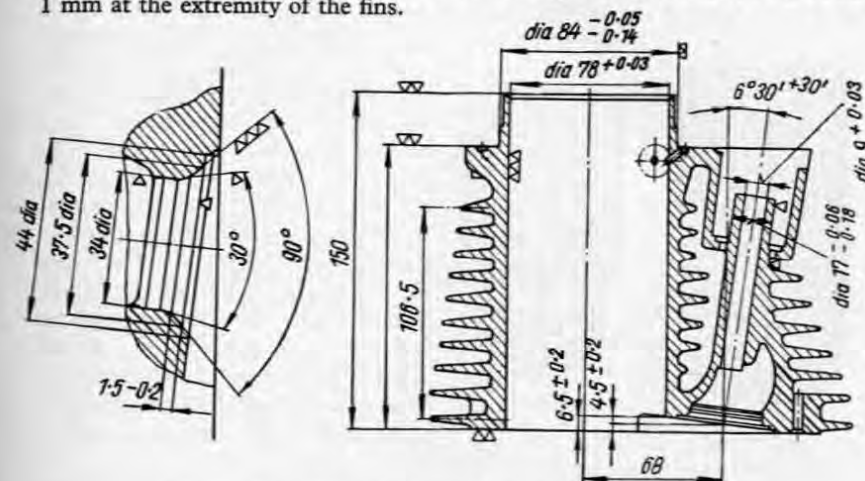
Cylinder of the Soviet M-72 motor-cycle engine.
